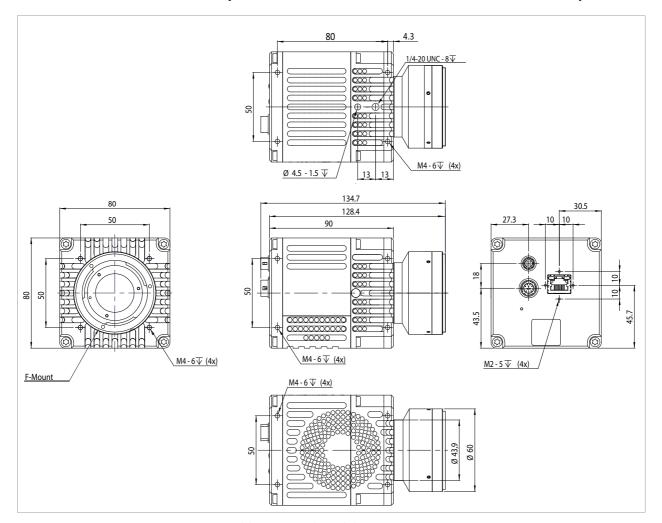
Goldeye G, Cool model, dimensions with F-Mount lens adapter
